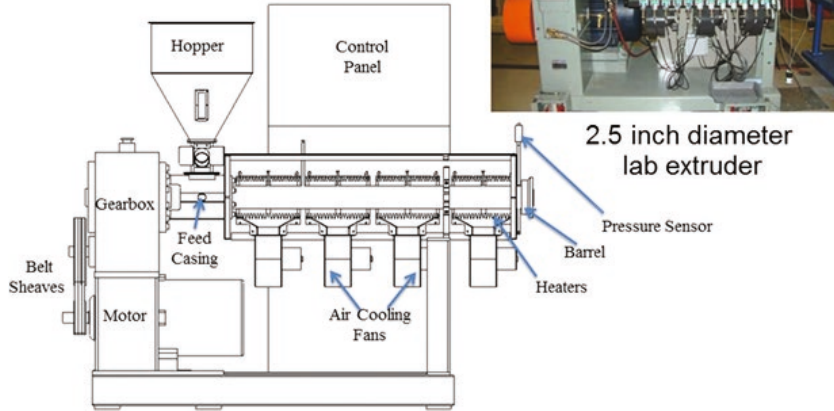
Typical single-screw extruder (courtesy of G. A. Campbell and M. A. Spalding, *Analyzing and Troubleshooting Single-Screw Extruders*, 2nd ed., Hanser (2021))
